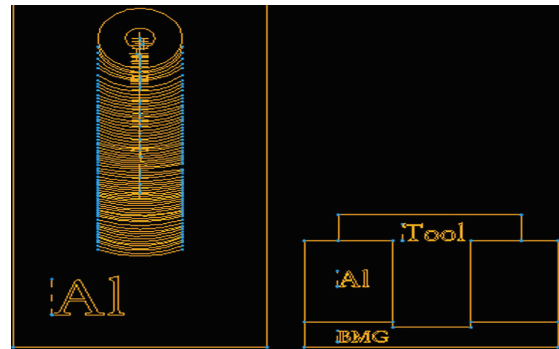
Schematic illustration of the positions of the tool and work-piece during the FSW. (F.P. Li et al. 2013)
